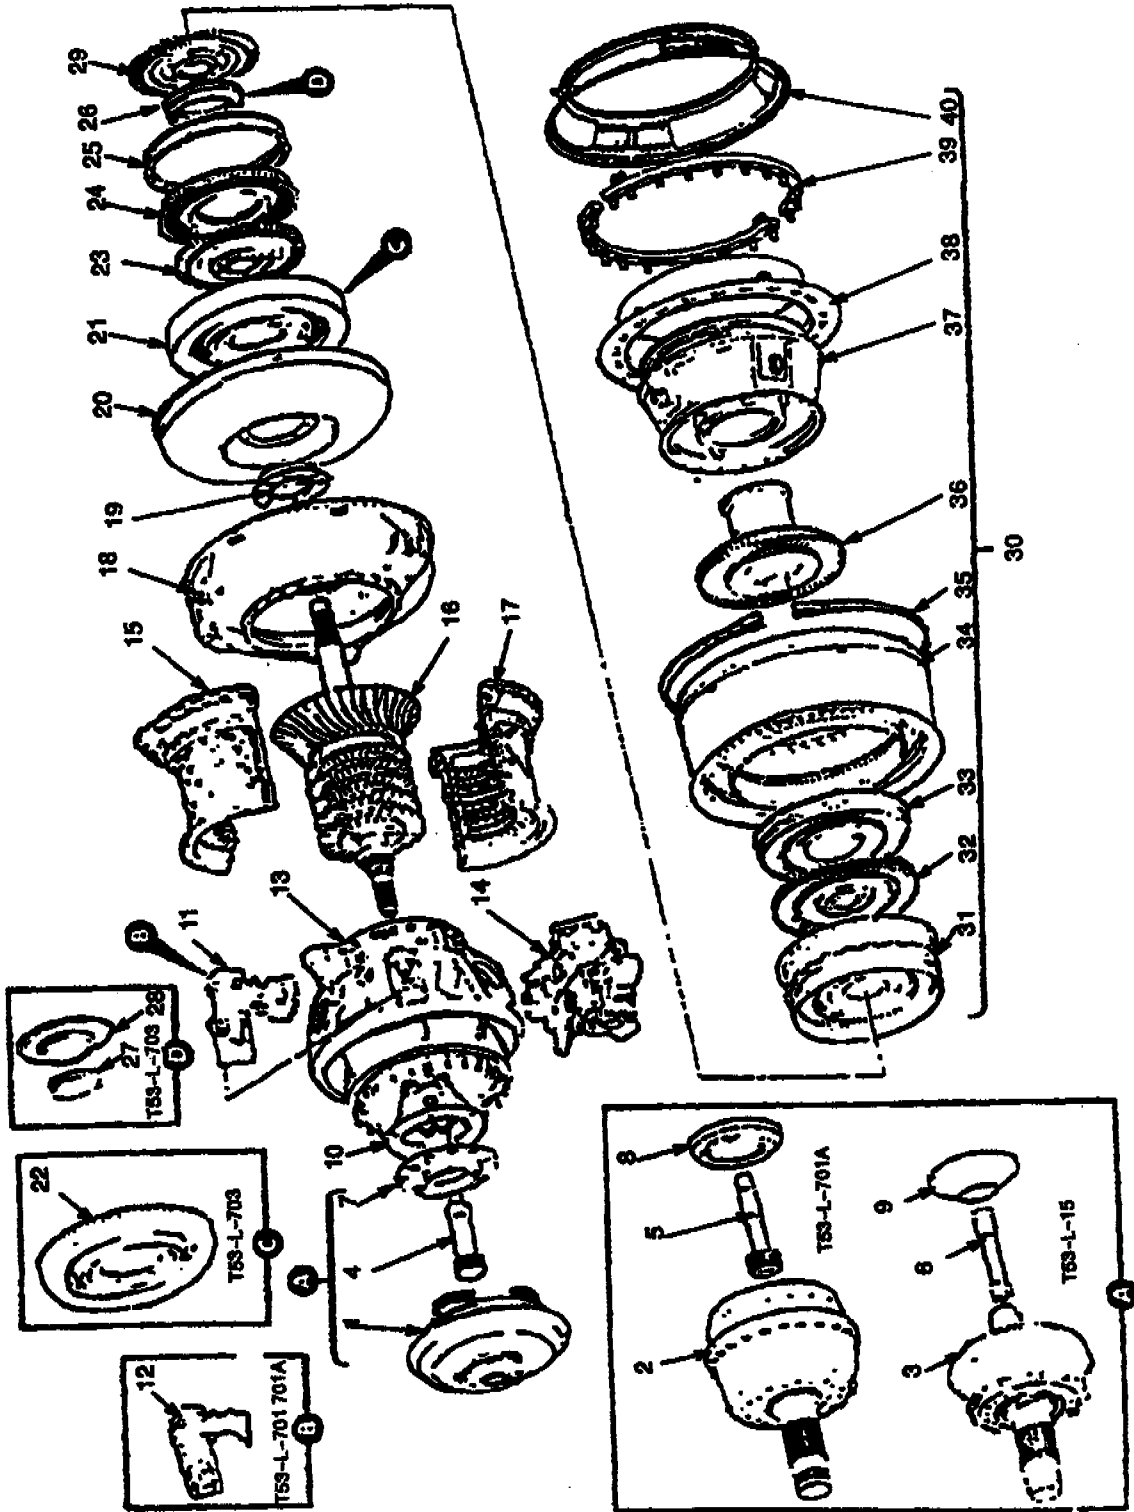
Engine Major Assemblies (Typical) (Sheet 1 of 2).
